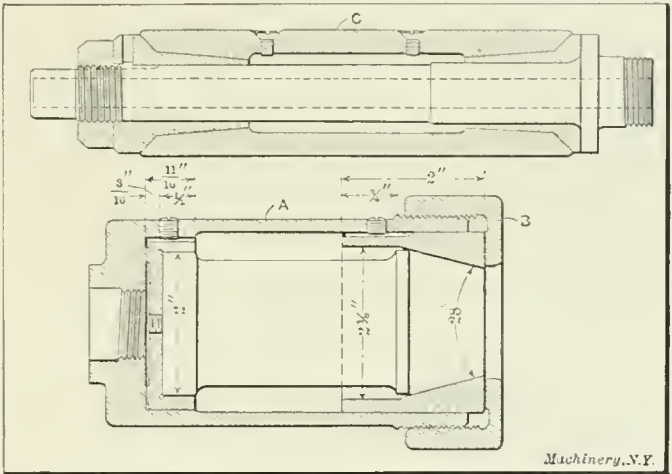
Holder and Quill for Grinding Hartford and Pratt & Whitney Collets
